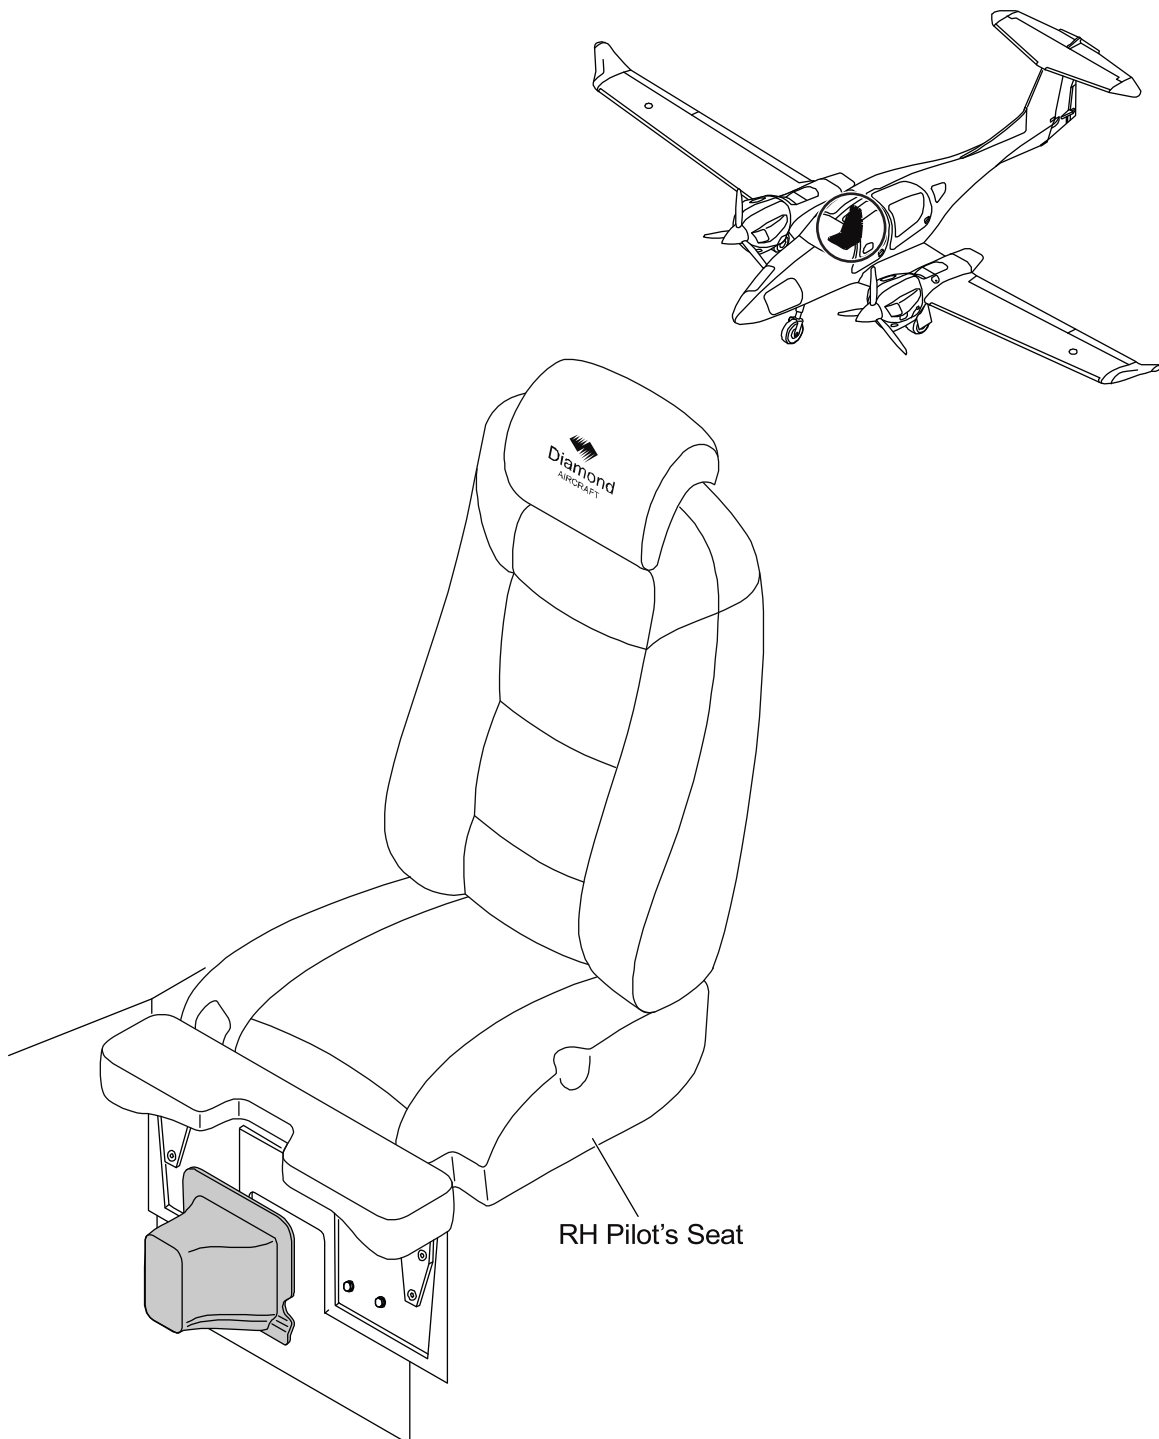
RH Stick Removed (if OÄM 62-025 is installed)
